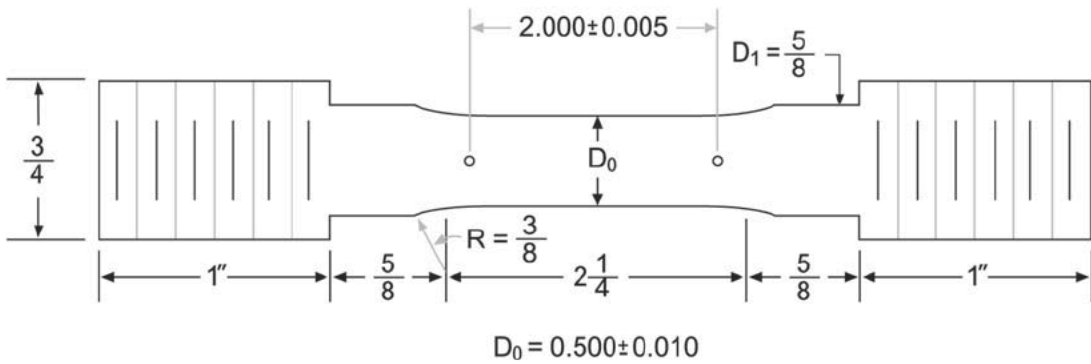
Standard dimensions (not at scale) of standard threaded test specimen for the tension machine. Dimensions in inches. Adapted, with permission, from ASTM E 8-00, "Standard Test Method for Tension Testing of Metallic Materials," ASTM International, copyright ASTM International.
